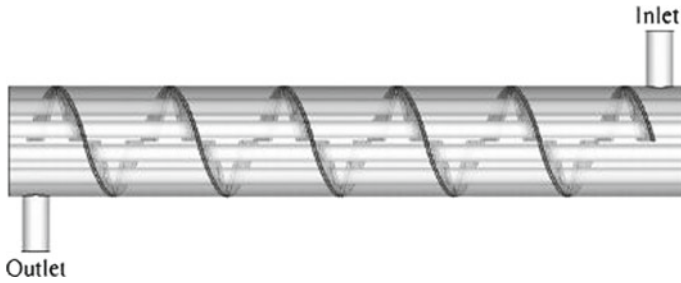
Shell-and-tube heat exchanger with helical baffle
